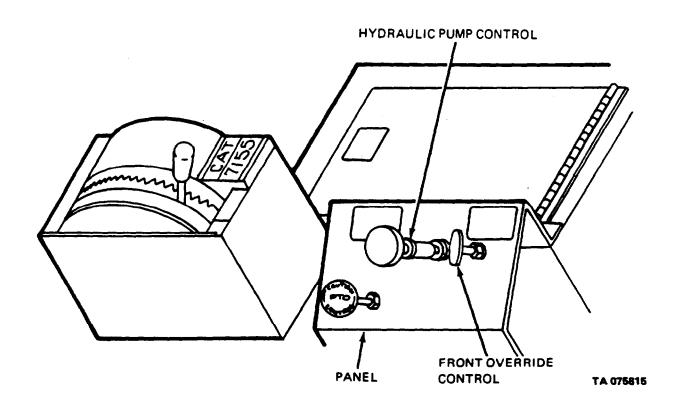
Hydraulic Pump Controls (Sheet 1 of 2).
